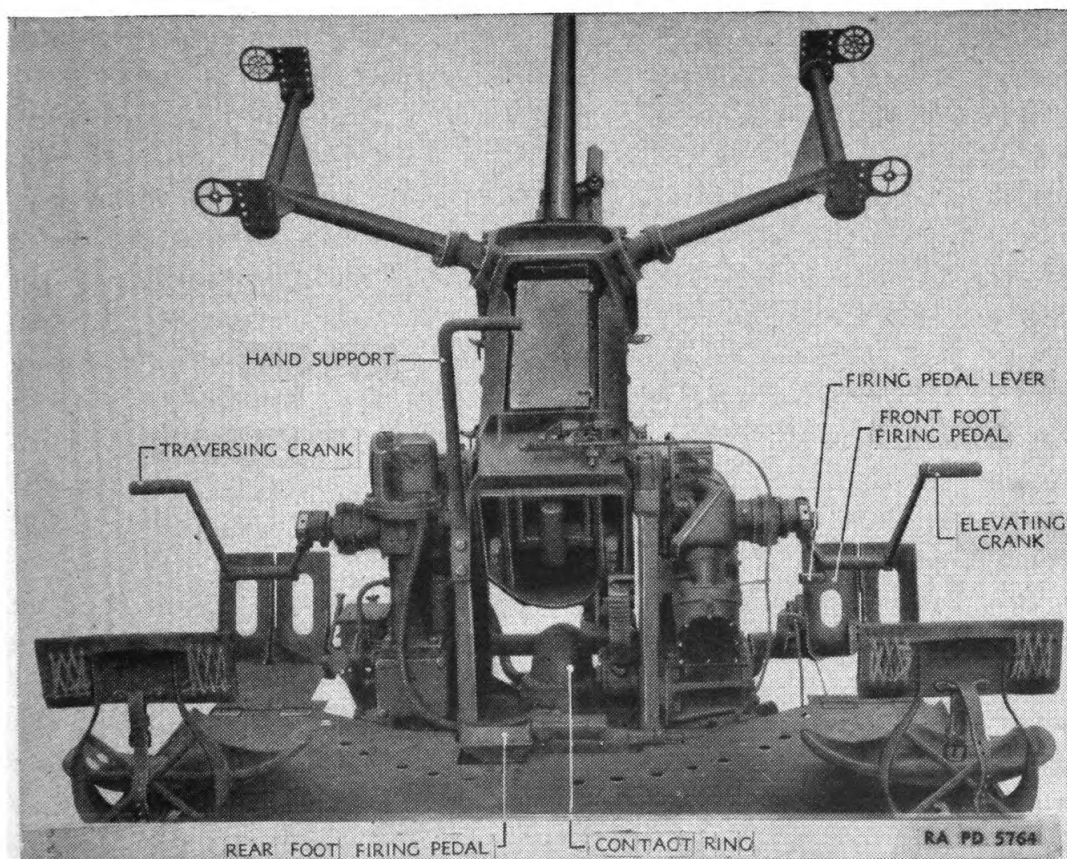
Rear view of top carriage of 37-mm AA gun carriage M3A1.
